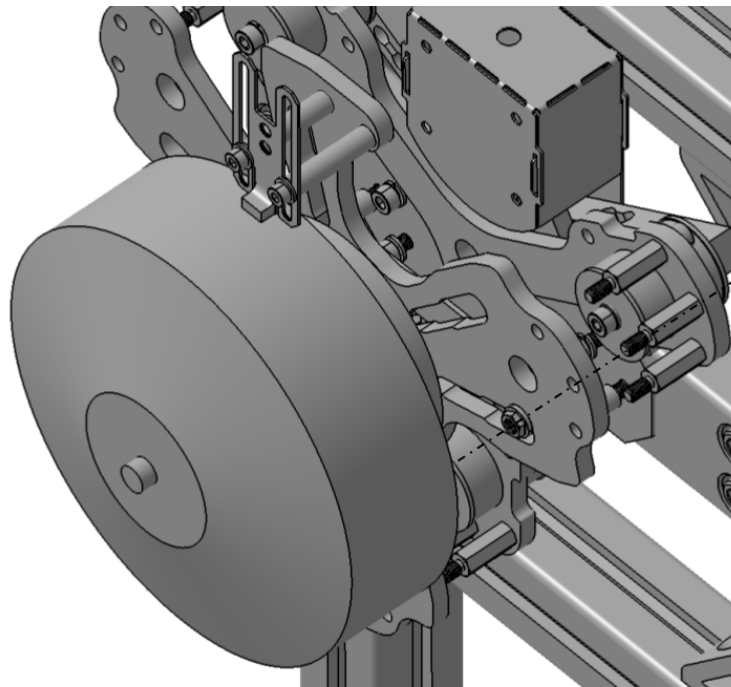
Connection of load measurement unit to motor mount assembly using M5 nuts
